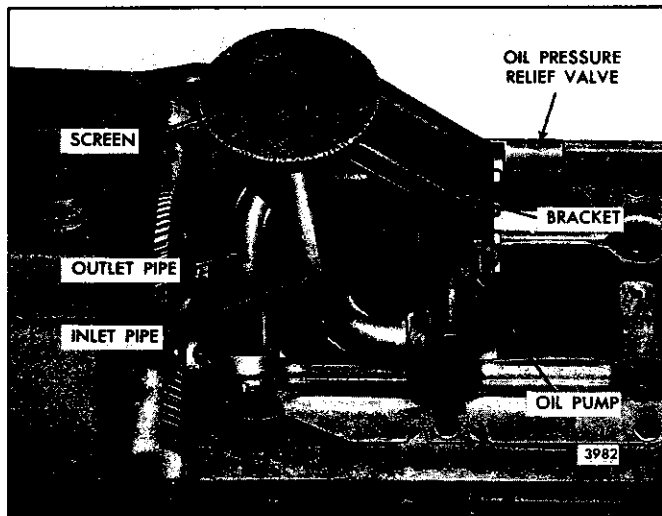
Lubricating Oil Pump Mounting (8V Engine)
